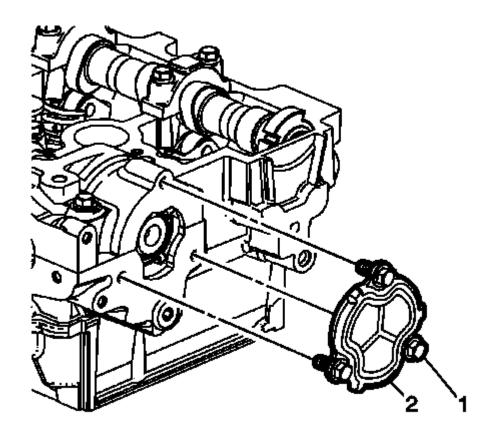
View Of Timing Chain Guide Bolt Access Hole & Plug Courtesy of GENERAL MOTORS COMPANY
